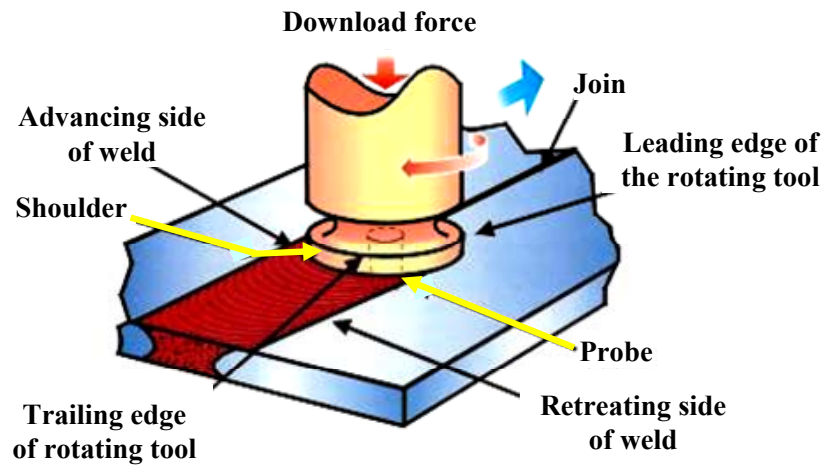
Schematic of the friction-stir welding (FSW).
